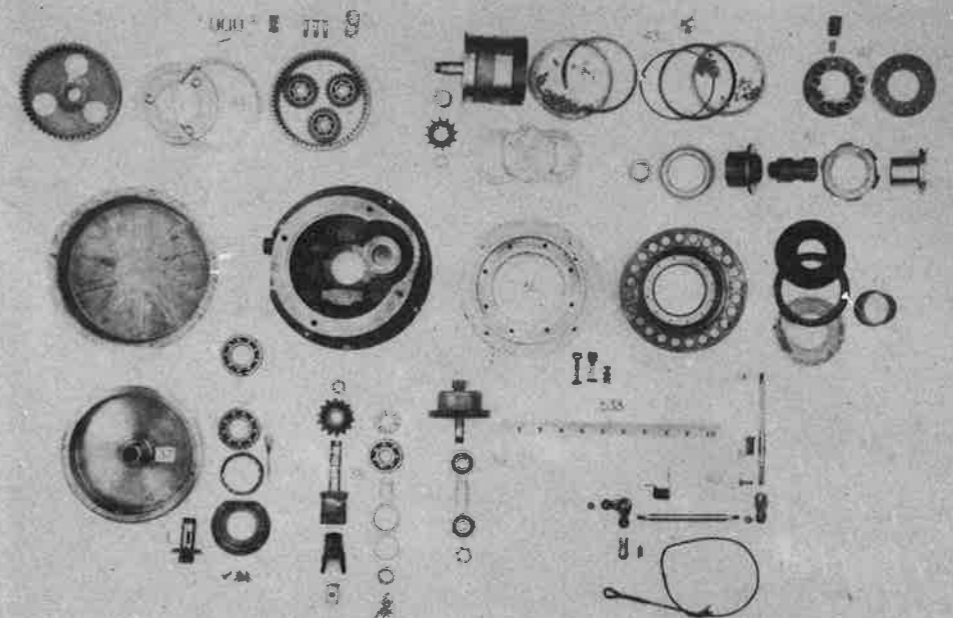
Inertia Starter Disassembly (CSE-2963). 29937
